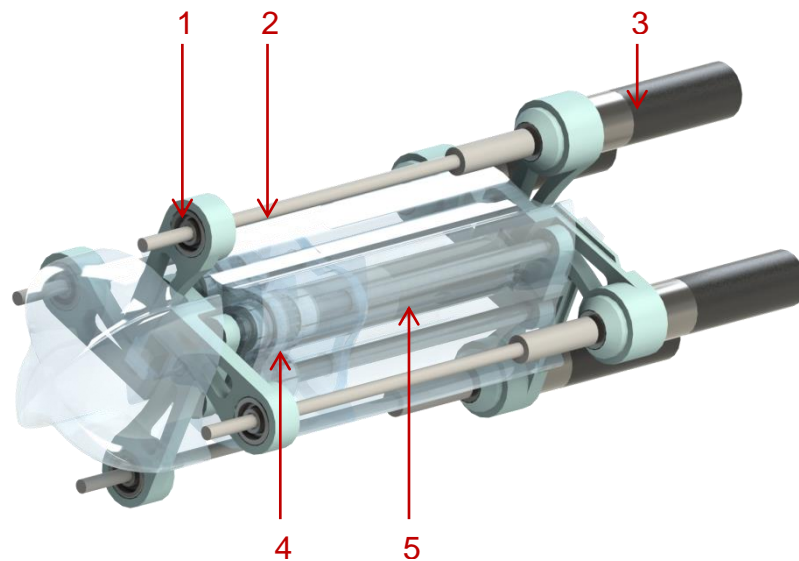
A computer model showing the screw motors exposed at the rear and the screw shafts transmission powering the screws. In the centre of the system, the internal motors and gears can be seen. Annotations show: 1) Bearing housed within arm; 2) Shaft connecting motor output and screw sections; 3) Screw motor; 4) Arm expansion mechanism; 5) Central motor used for arm expansion.
